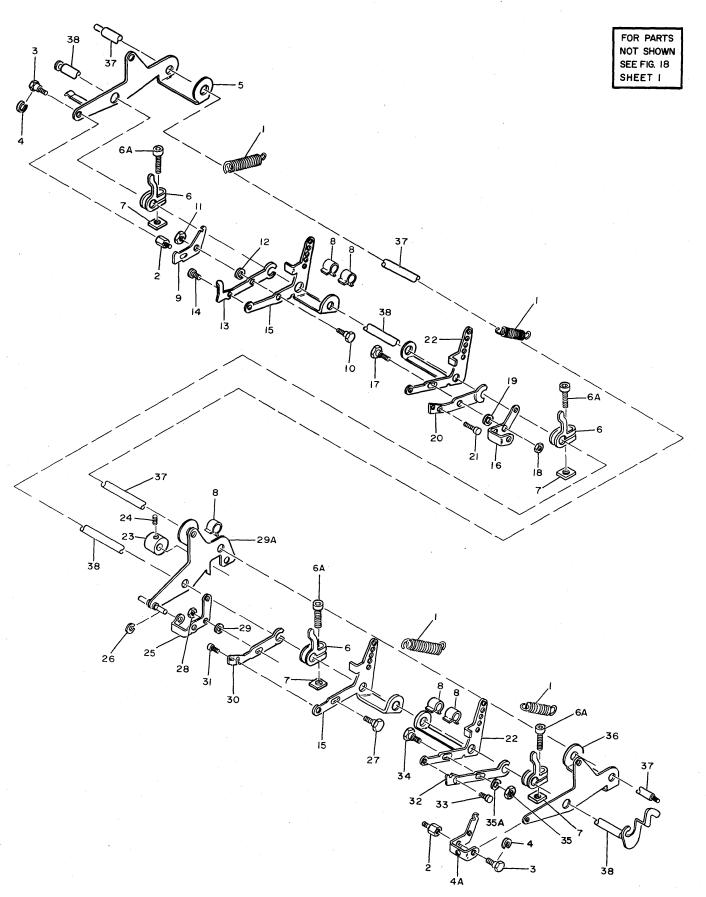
PAPER FEED ASSEMBLY. SHEET 1 OF 2. INDEX NOS. 1-38.
